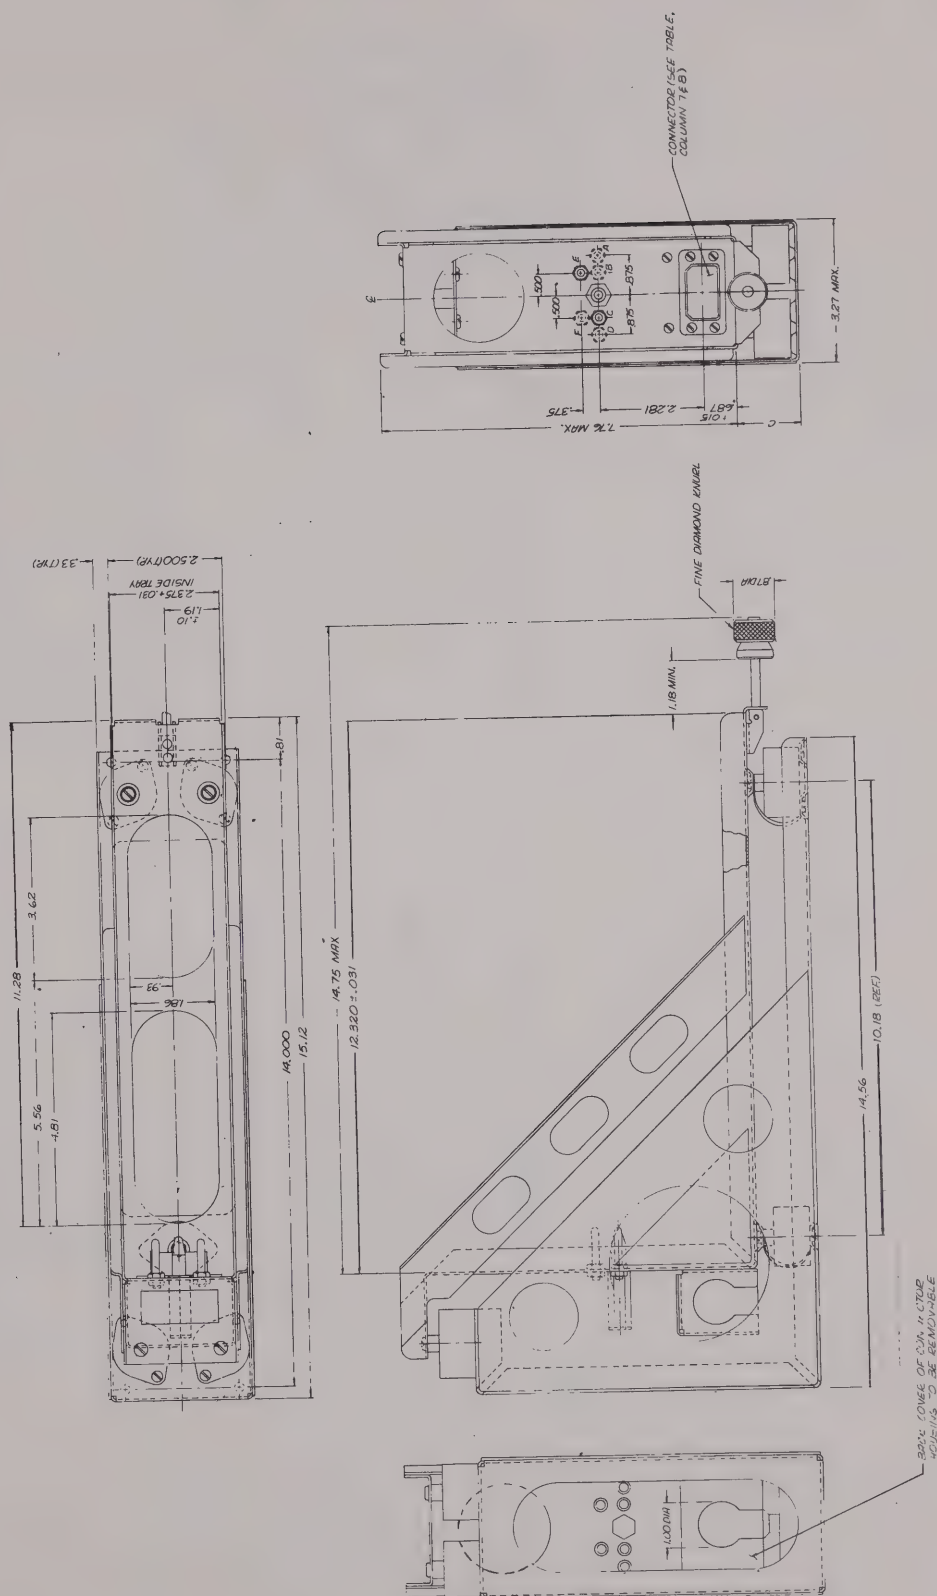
MTA-21EG Shockmount (For NVA-22), Outline Drawing.
